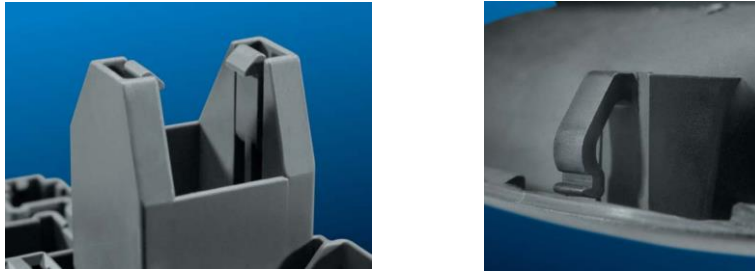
Snap-fit joints are commonly used in automotive engineering because they can be used to quickly and inexpensively assemble plastic parts. Pictured: an automotive fuse box (left) and door handle bezel (right) (Photos taken from BASF “Snap-Fit Design Manual” [2]).
